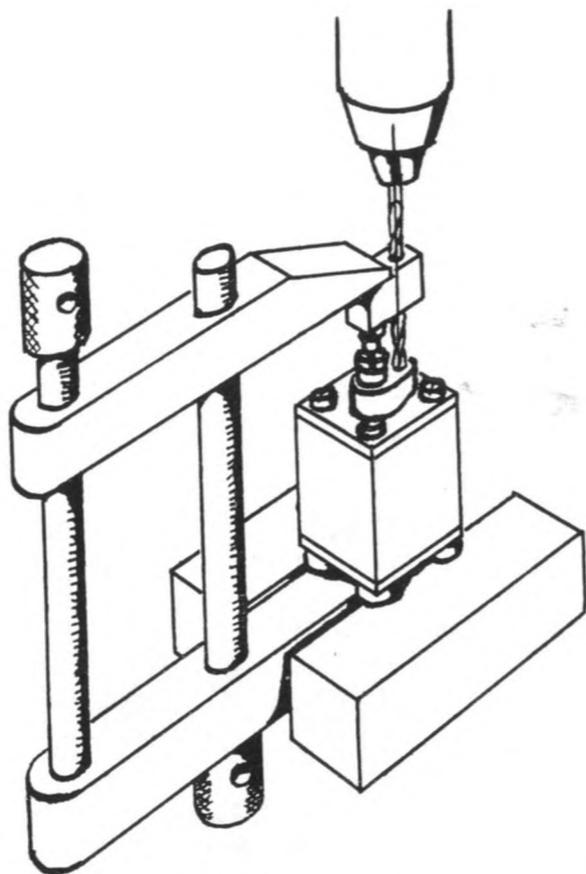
Spotting through the crosshead to position the guide-bar hole. (See Fig. 55)
